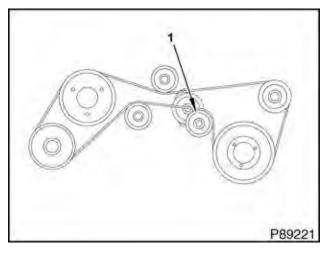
Accessory Belt Routing - Low Mount Fan Drive
